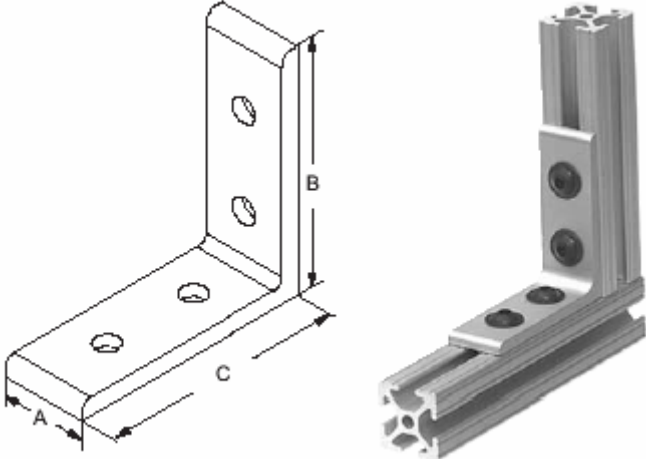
Engineering drawing and an example of a corner connection bracket
